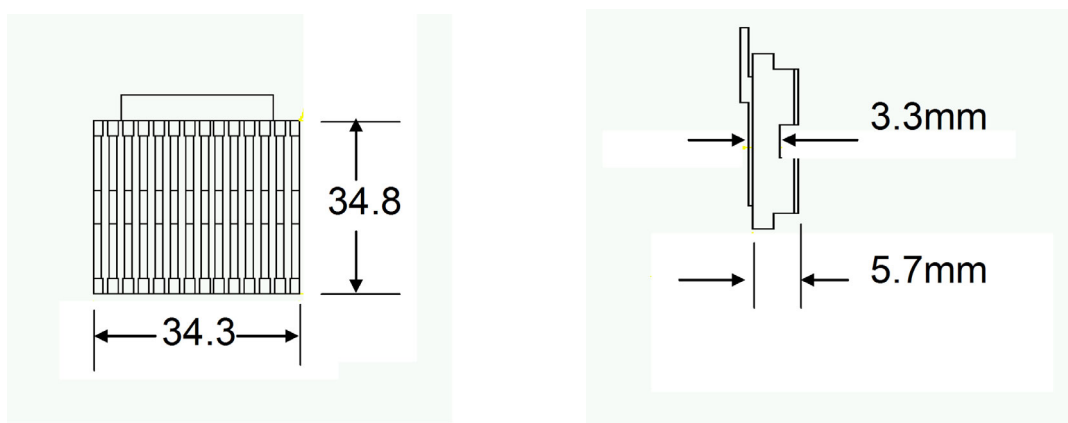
82576 Extruded Heat sink (in millimeters)
